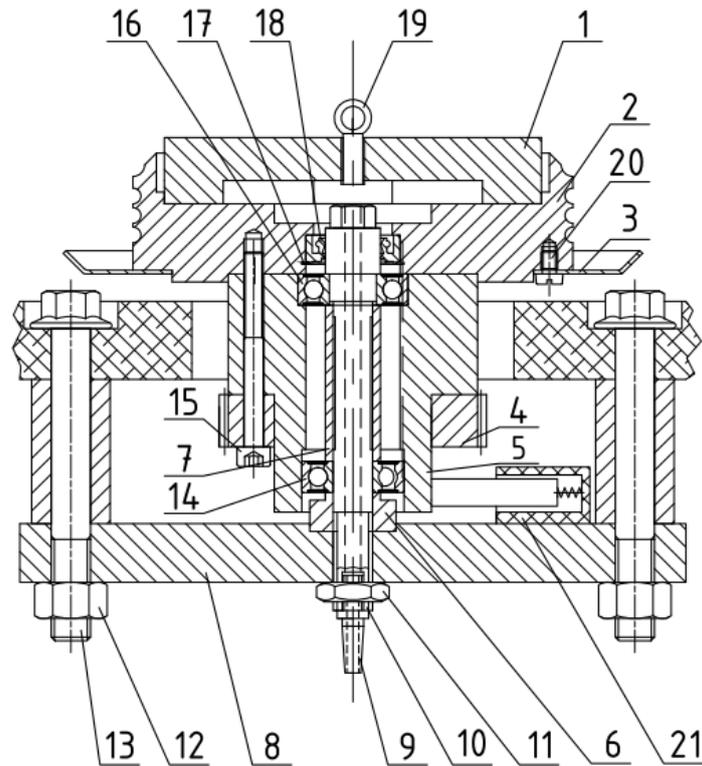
Engineering draft of the spinneret, 1: lid, 2: spinneret, 3: overflow collecting plate, 4: belt drive, 5-7: bearing holders, 8: base platform, 9: solution inlet, 10: shaft, 11-13: hex nuts and screws, 14: deep groove roller bearing, 15: holder screws, 16: deep groove roller bearing, 17-18: sealing and holder, 19: lid screw, 20: screws, 21: carbon brush
